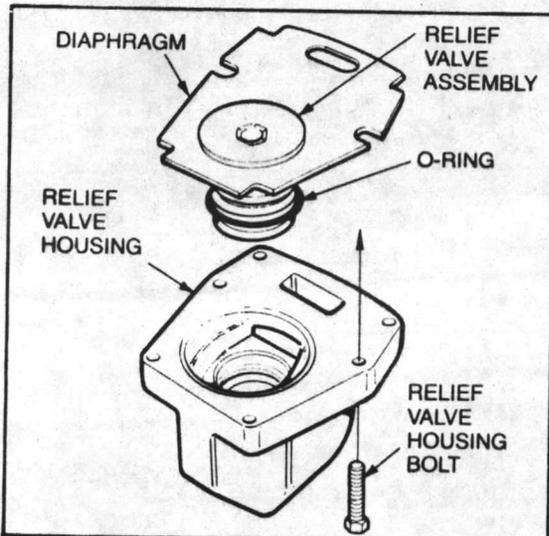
A. RELIEF VALVE ASSEMBLY FRP-I
